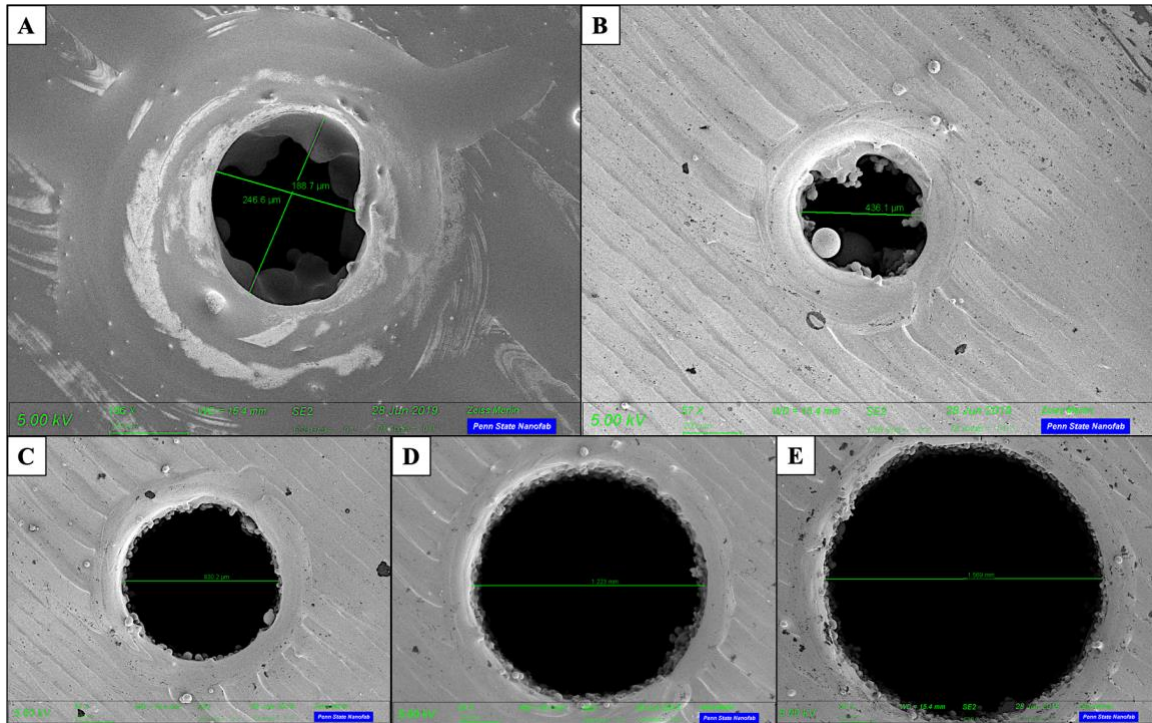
After PRC plating, through-holes on sample piece: (A) 1/128in, (B) 1/64in, (C) 1/32in, (D) 3/64in, (E) 1/16in.
